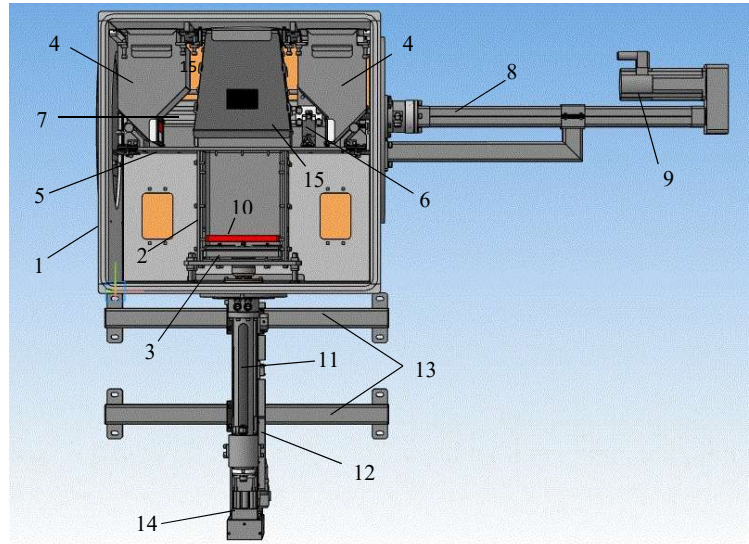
Vacuum chamber equipment: 1 – vacuum chamber; 2 – shaft; 3 – platform; 4 – bunker; 5 – table; 6 – rail; 7 – guides; 8 – actuator; 9 – electric motor; 10 – pallet; 11 – spindle; 12 – rail; 13 – bracket; 14 – electric motor; 15 – reflector
